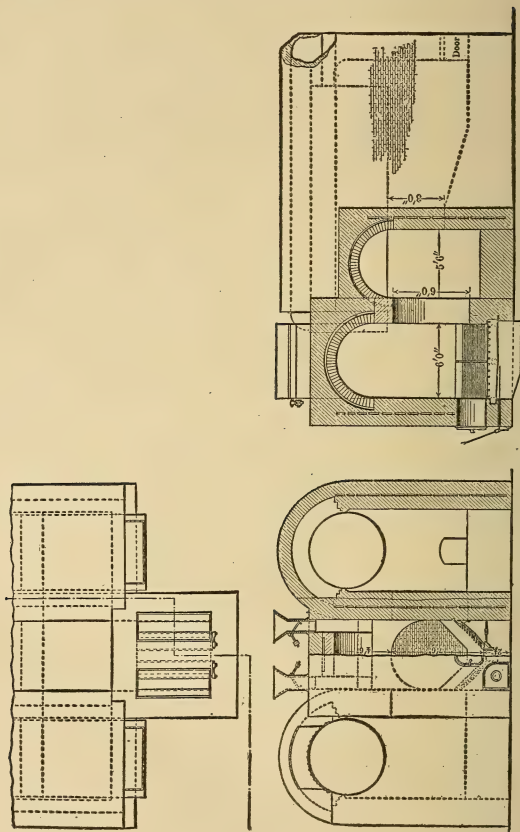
PLANS AND SECTIONS OF MYERS'S BAGASSE FURNACE
